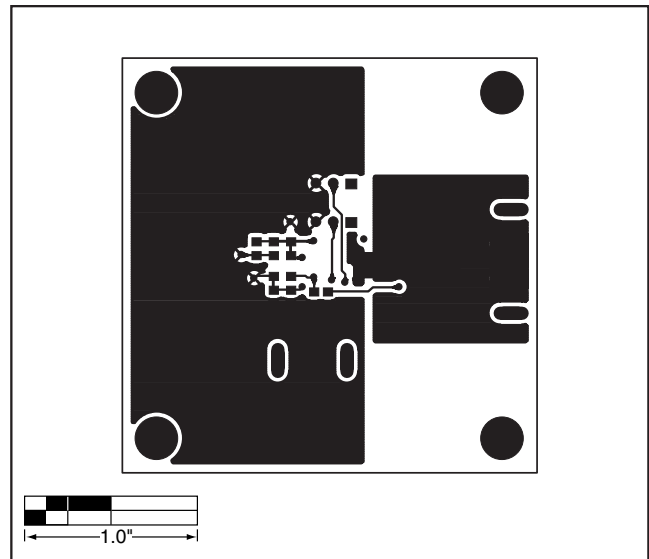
MAX1760 EV Kit PC Board Layout—Solder Side
